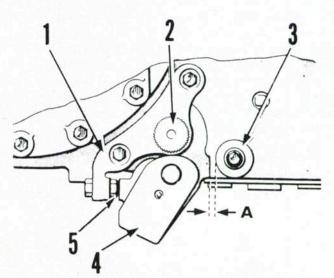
View of draft control lower linkage stop adjustment points. Eccentric stop (3) on left side of rear axle center housing should be adjusted to provide a gap (A) of 0.330-0.340 inch (8.4-8.6 mm) between stop and lift link hanger (4).
